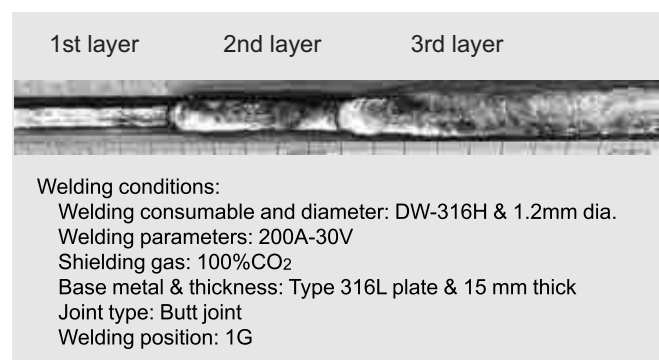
Bead appearance of DW-316LH weld metal
